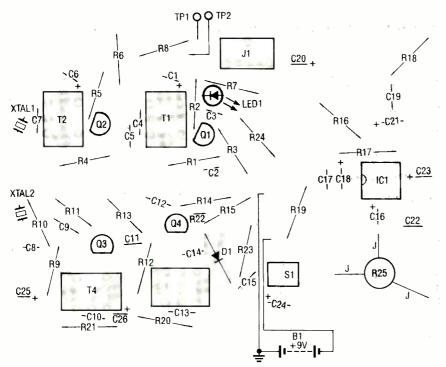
PARTS PLACEMENT. Mount and solder all components as shown here.
